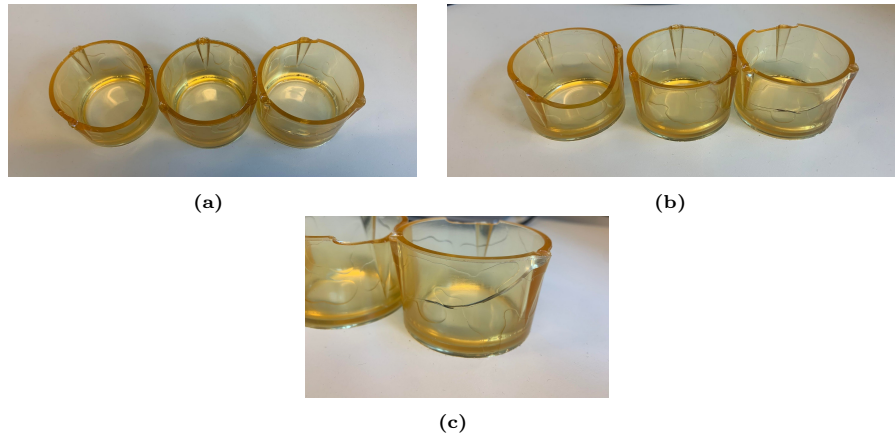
The epoxy cups made in the first casting: (c) Cup 3A showing a crack in the wall.
